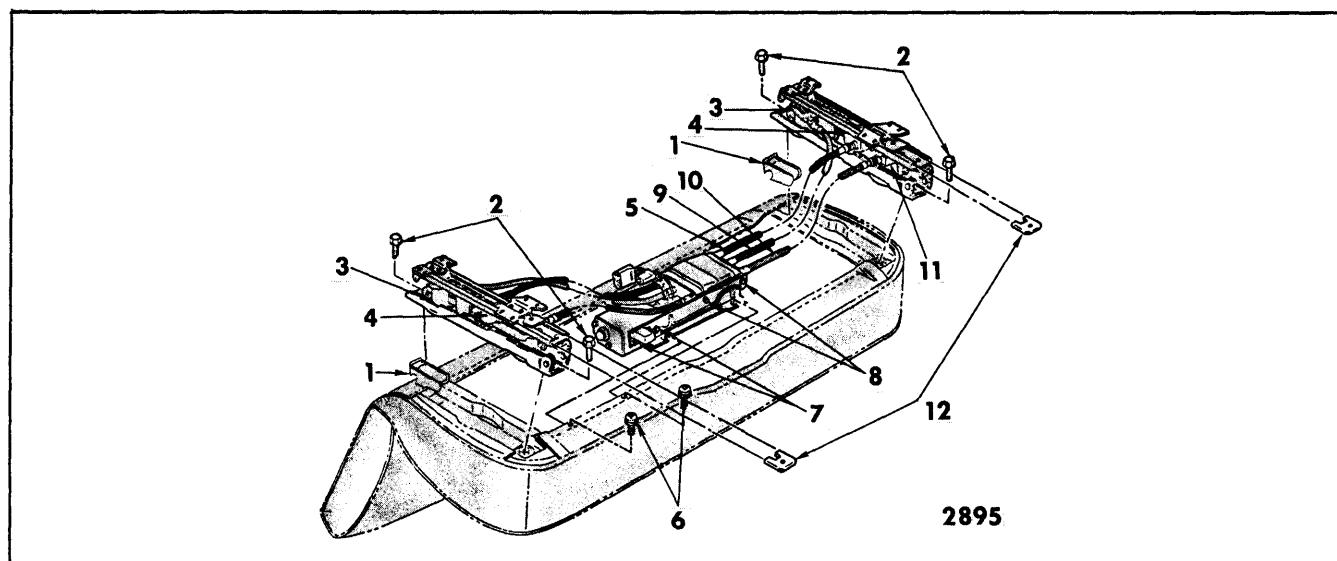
Front Seat Assembly—Six-Way - "B & C" Full Width Seat
